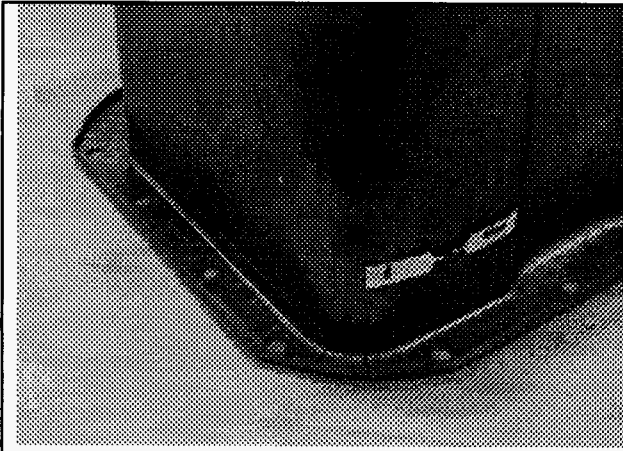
(a). Cracks in the draw corner of an a V-8 engine oil pan made with steel S6b.
